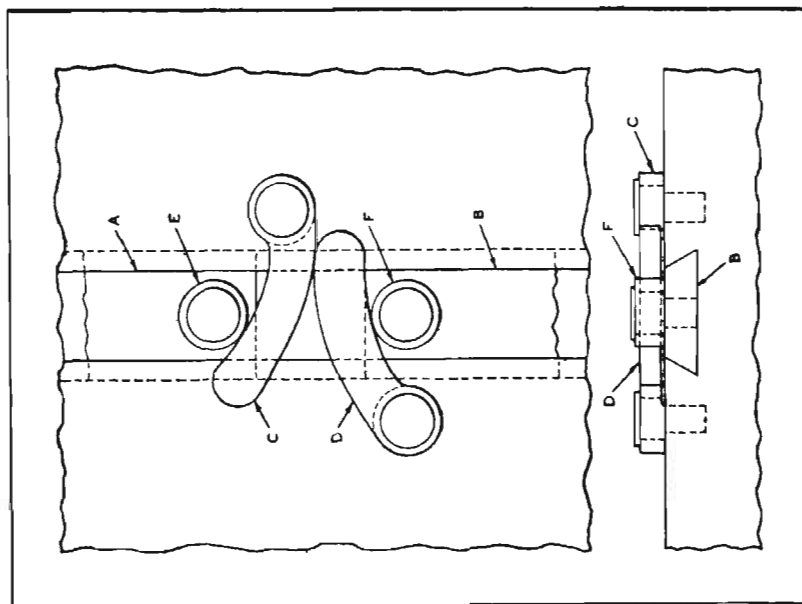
Mechanism Shown in Fig. 3 with Slide Near Upper End of Stroke.
